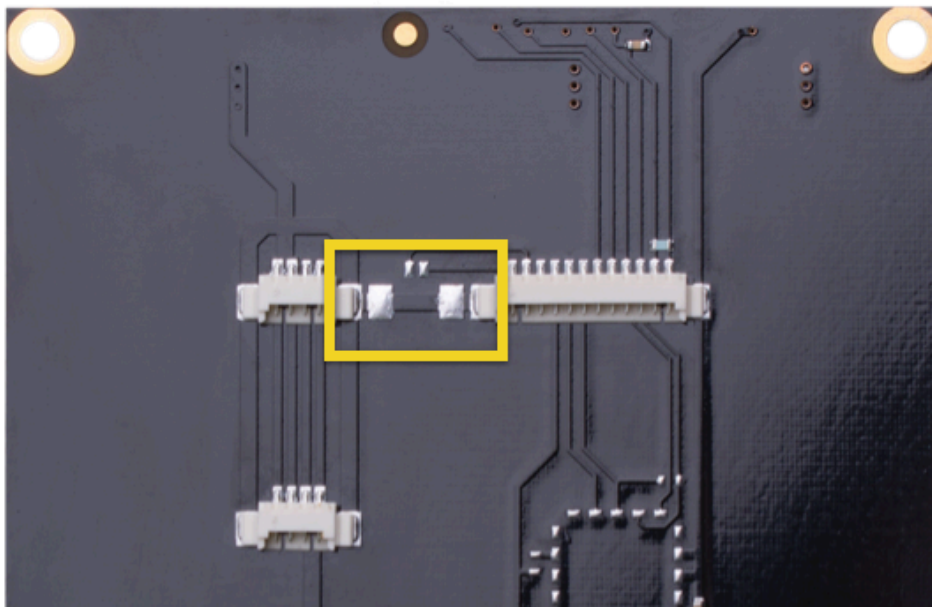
Solar Panels X Y - bottom side - pads location for the external magnetorquer connector
